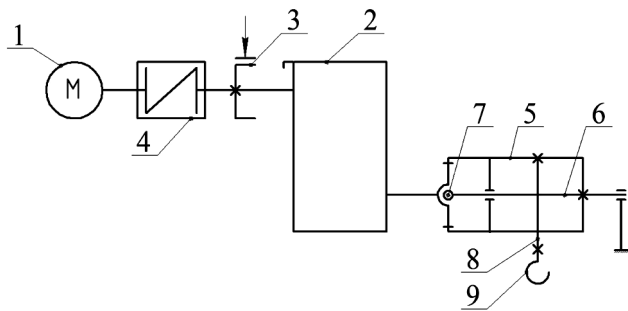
Kinematic scheme of an overhead crane lifting gear: 1 – electric motor; 2 – gear box; 3 – electromagnet block brake; 4 – flexible bolt coupling (with brake pulley); 5 – drum; 6 – drum axle (or shaft); 7 drum support; 8 – load cable; 9 – hook assembly
